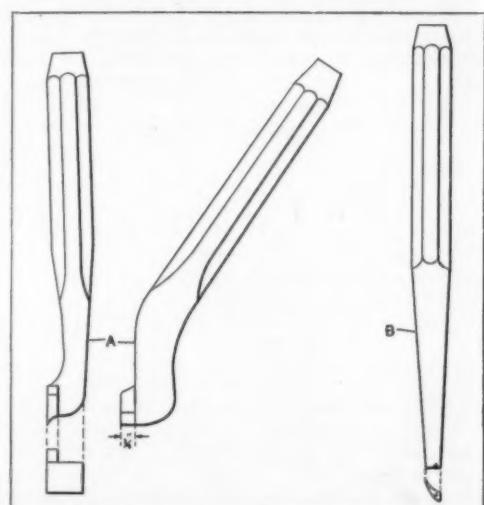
Tools used for expanding the calking strips sidewise and endwise.
